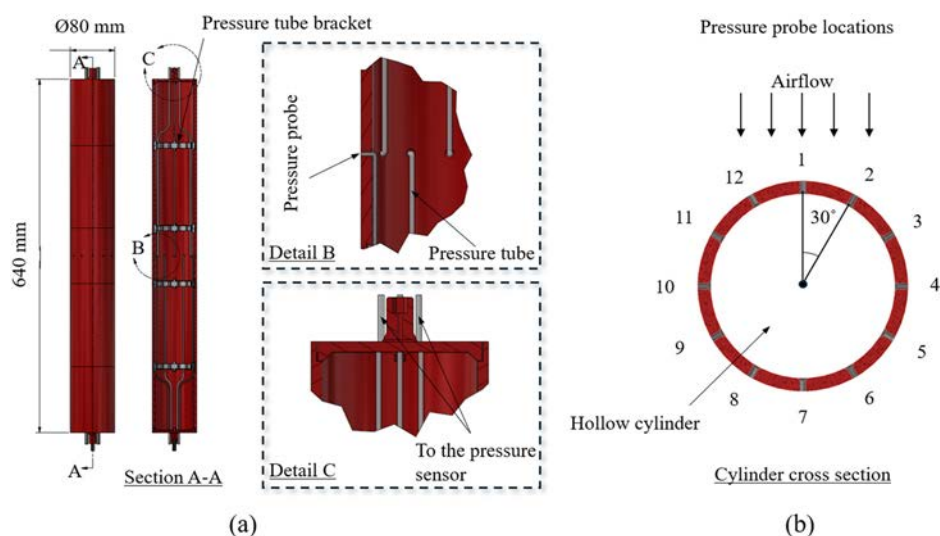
The cylinder details: (a) detailed drawing and (b) probe location schematic.
